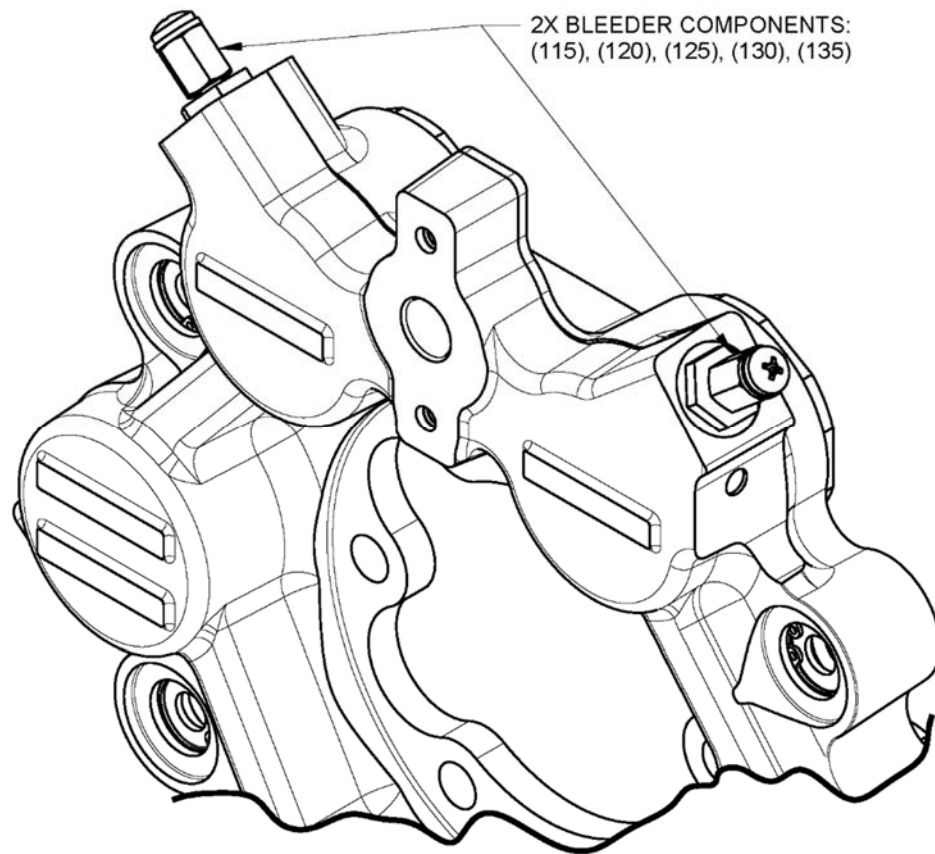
Remove the bleeder components (115), (120), (125), (130), (135)
